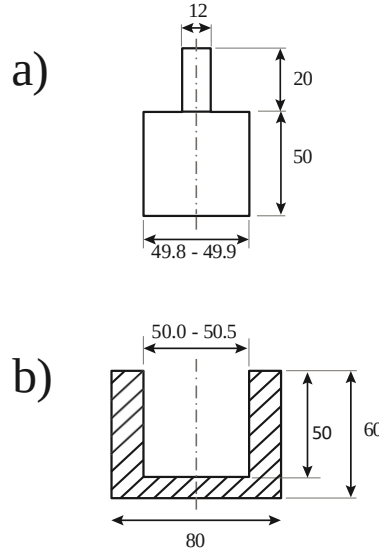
BCS test apparatus: a) Piston; b) sample holder.
